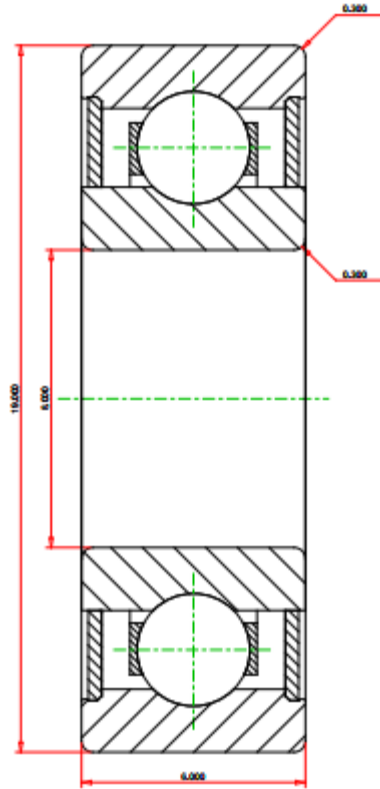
Timken Co. 619/8-2RS Single-Row Deep-Groove Ball Bearing Drawing [20]
